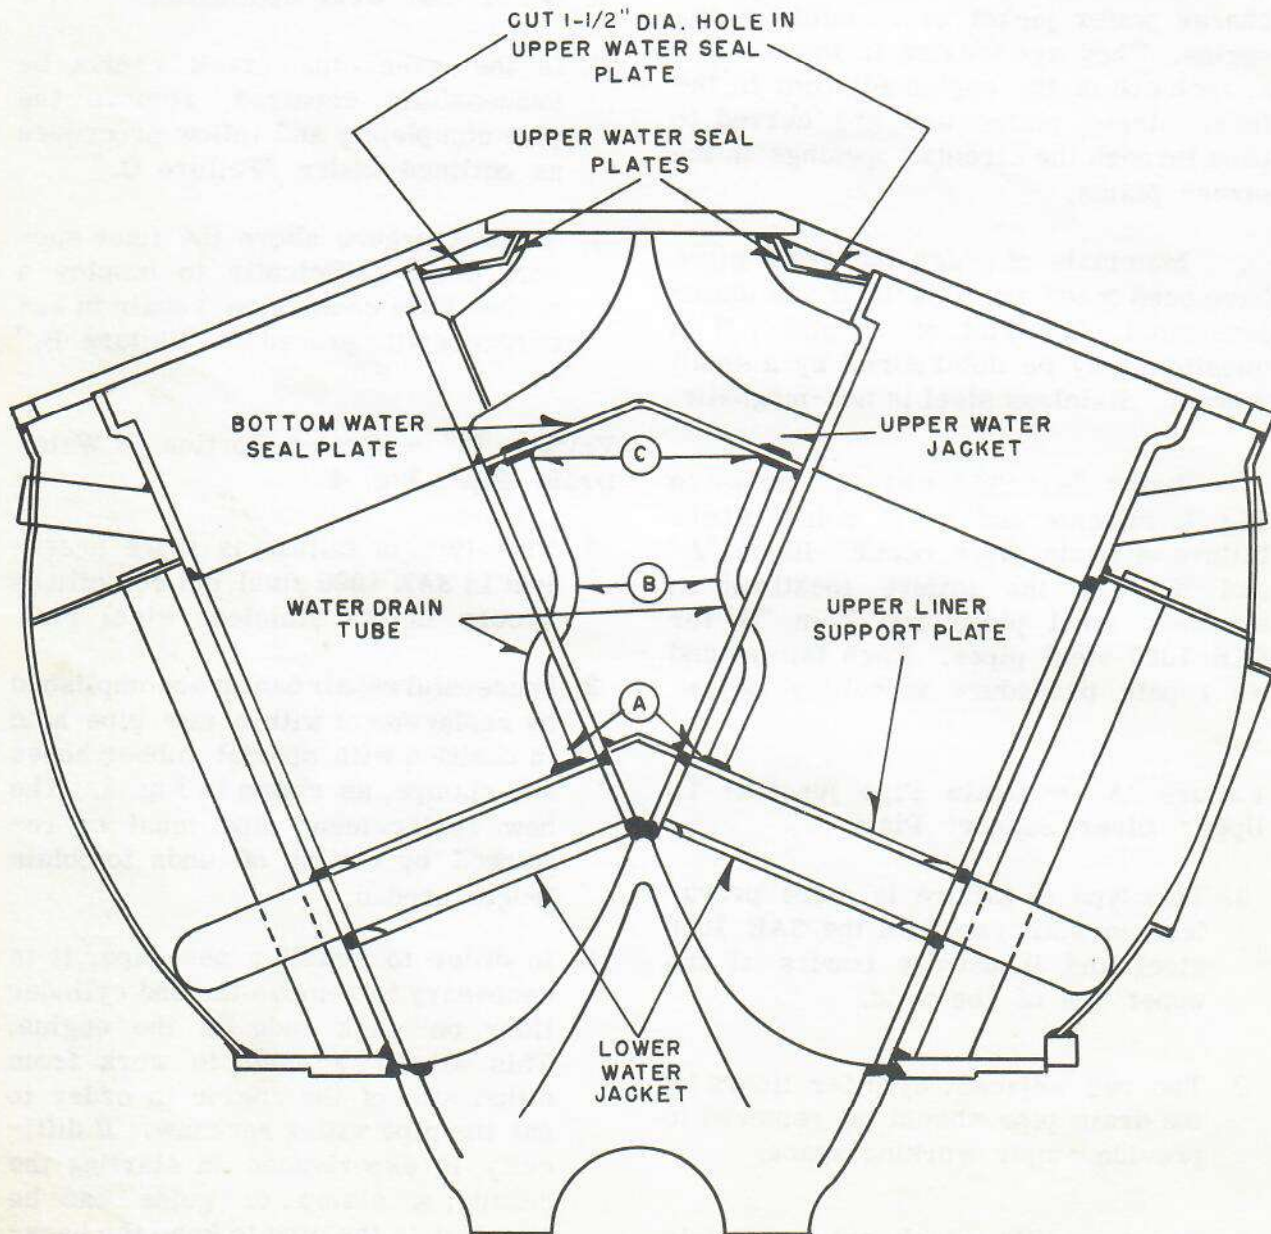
Engine Cross-Section - Drain Pipe Failure Locations
